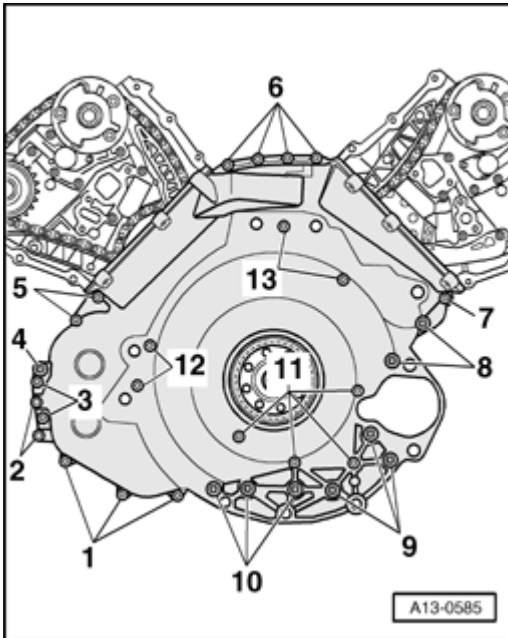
Removing Bolts And Lower Timing Chain Cover
